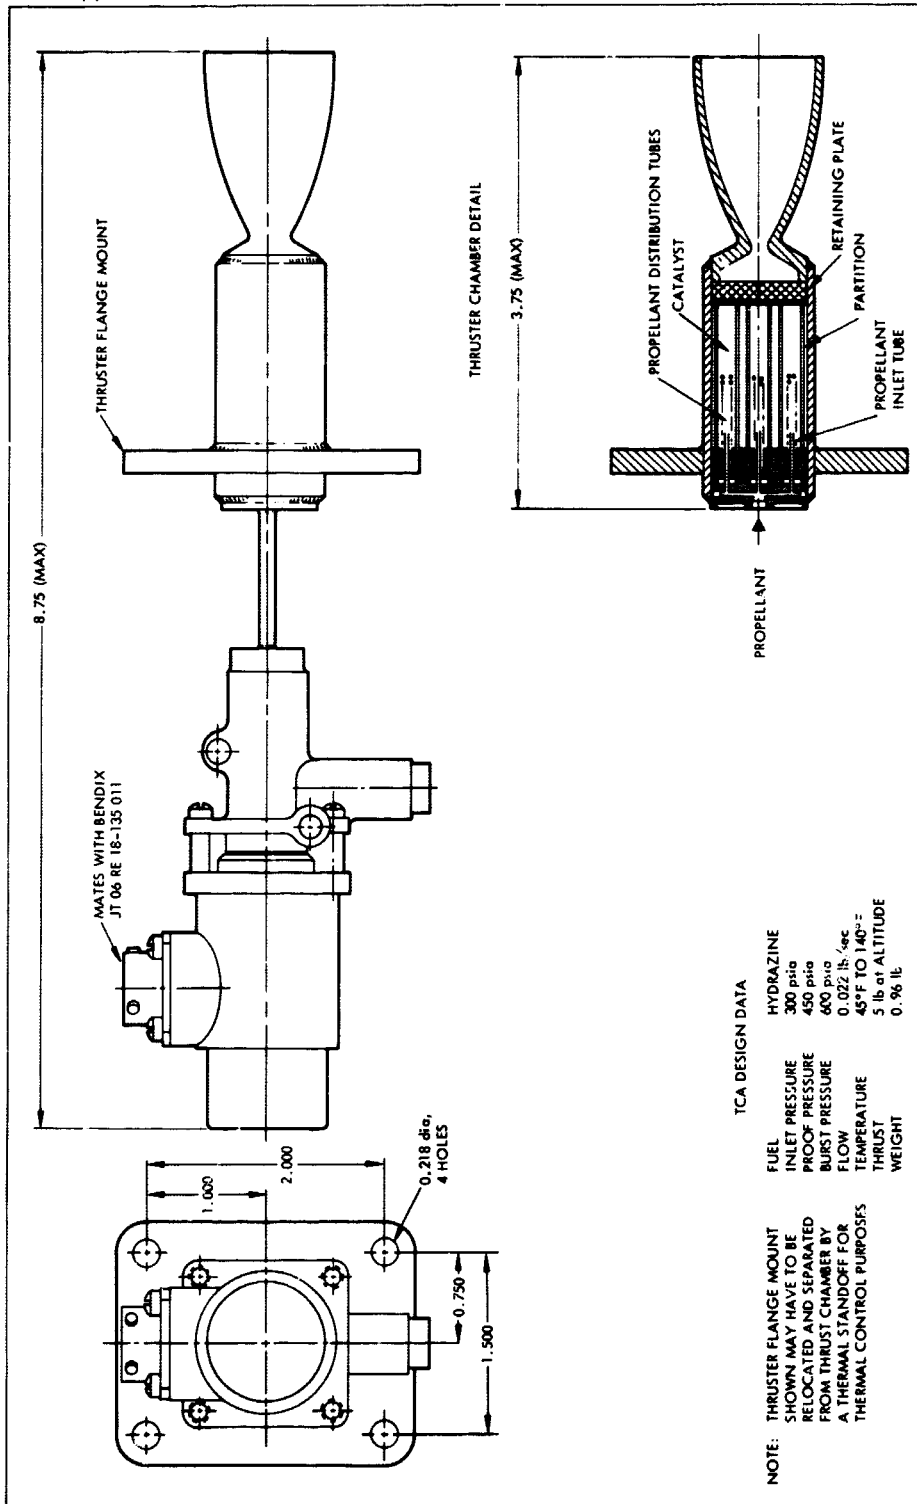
W. Kidde Company 5-Pound Hydrazine Thruster Assembly
